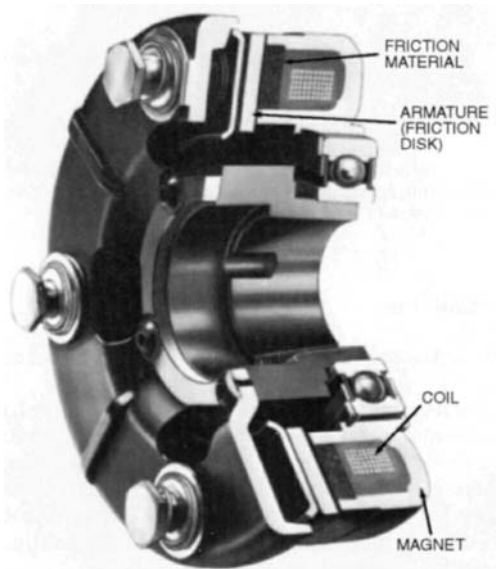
Electromagnetic friction clutches and brakes. (Warner Electric Brake and Clutch Co.)
